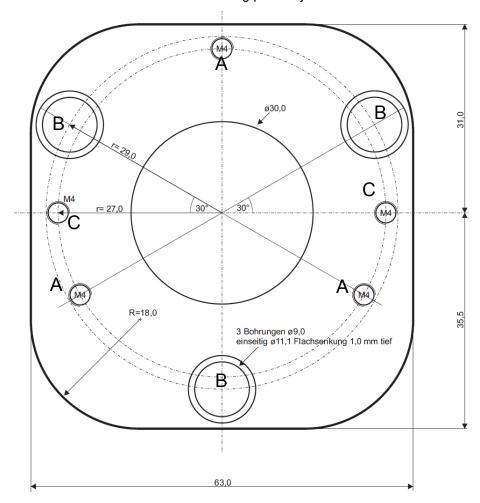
Mounting plate for magnetic holder, thickness 3 mm. (39MMP1\_R0.2 of 29.04.2011)
